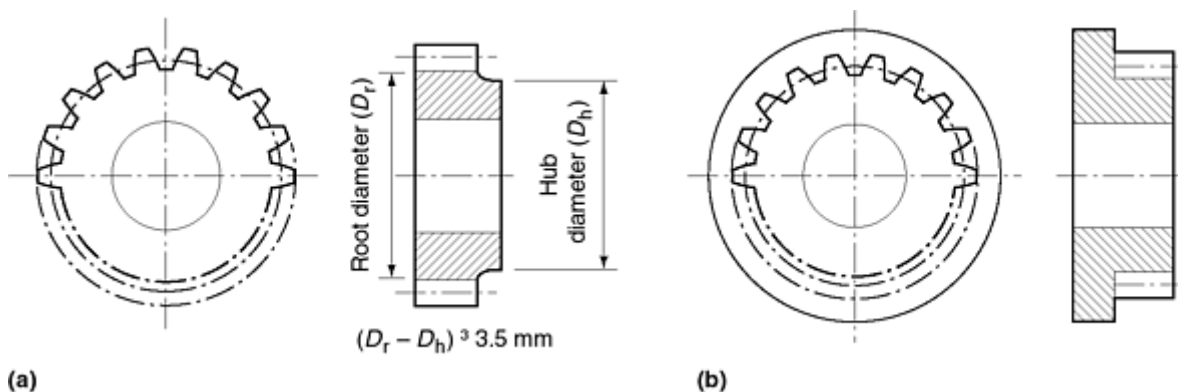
Features produced in powder metallurgy gears. (a) True involute forms. (b) Gear teeth straight up to a flange in P/M gear. Source: Ref 3
